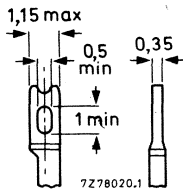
90° angled dip-solder pins, with protruding earth contacts.
